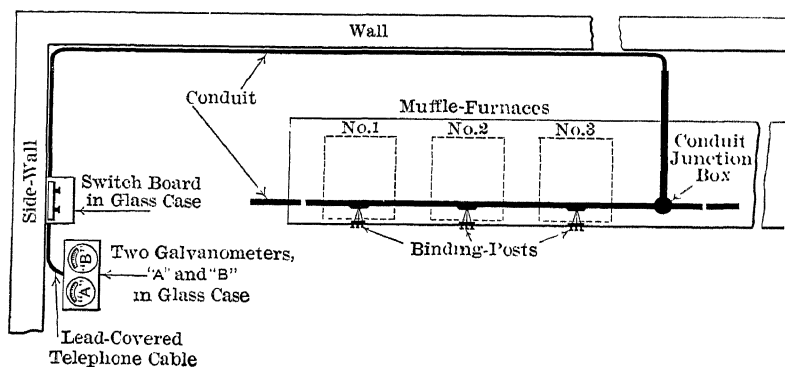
PLAN SHOWING ARRANGEMENT OF FURNACES, SWITCH-BOARD, AND PILLAR FOR GALVANOMETER.
